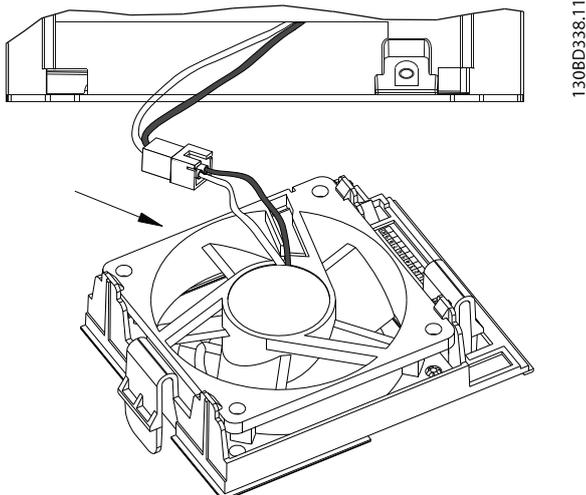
Fan Cable Plug. Plug Location Depends on Fan Type
